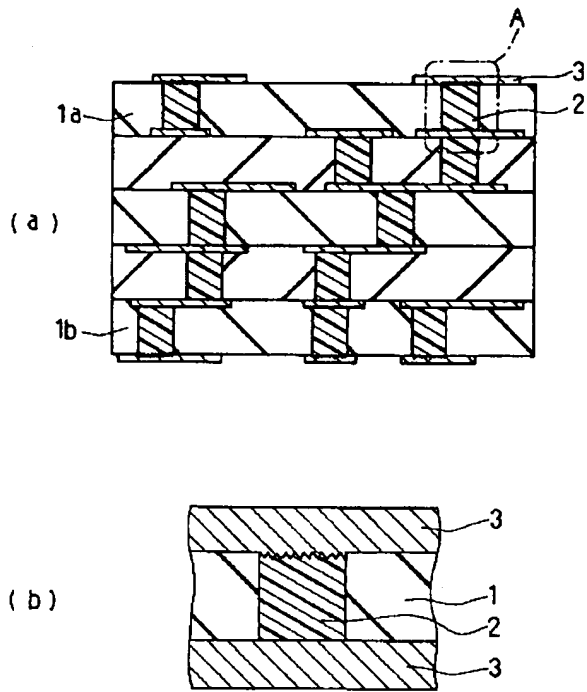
A cross-sectional view of the steps in the circuit board manufacturing method of the sixth embodiment.
